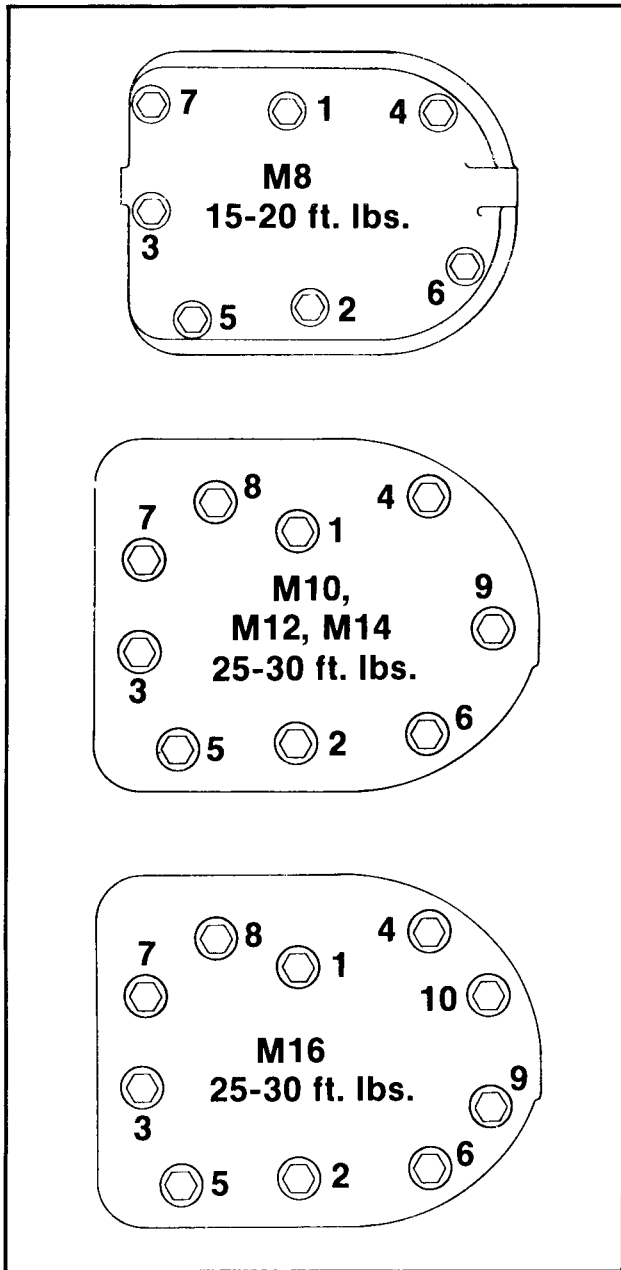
Cylinder Head Fastener Tightening Sequence.
